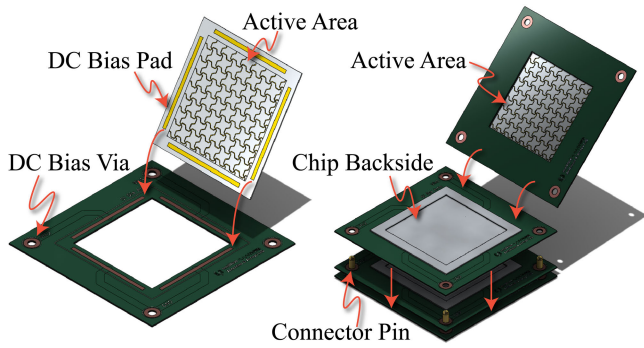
Assembly procedure of the polarizer. We bond each metasurface chip to a PCB, and we layer four PCBs to complete assembly of the device. Connector pins ensure alignment between the layers and provide external dc connection points.
